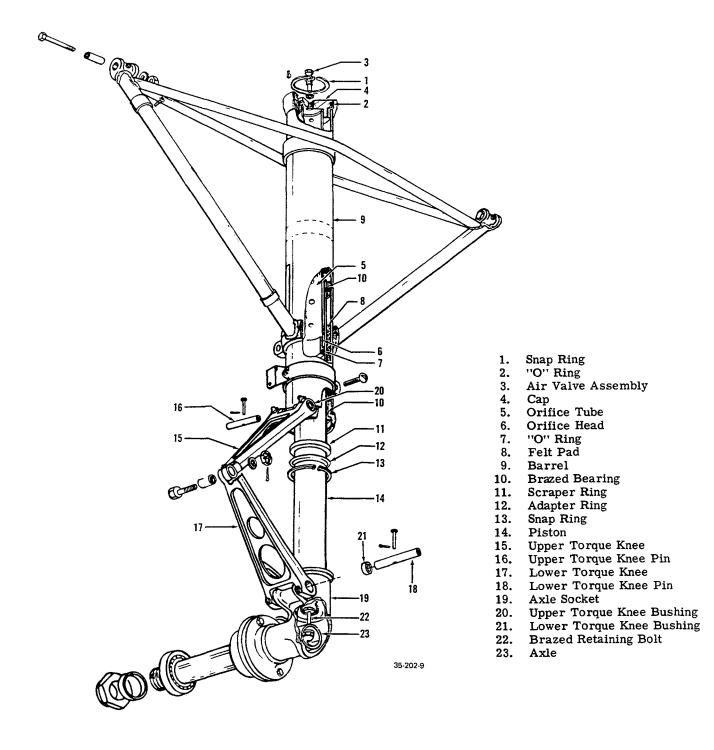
Main Gear Shock Strut (Serial D-5791 thru D-7132)
